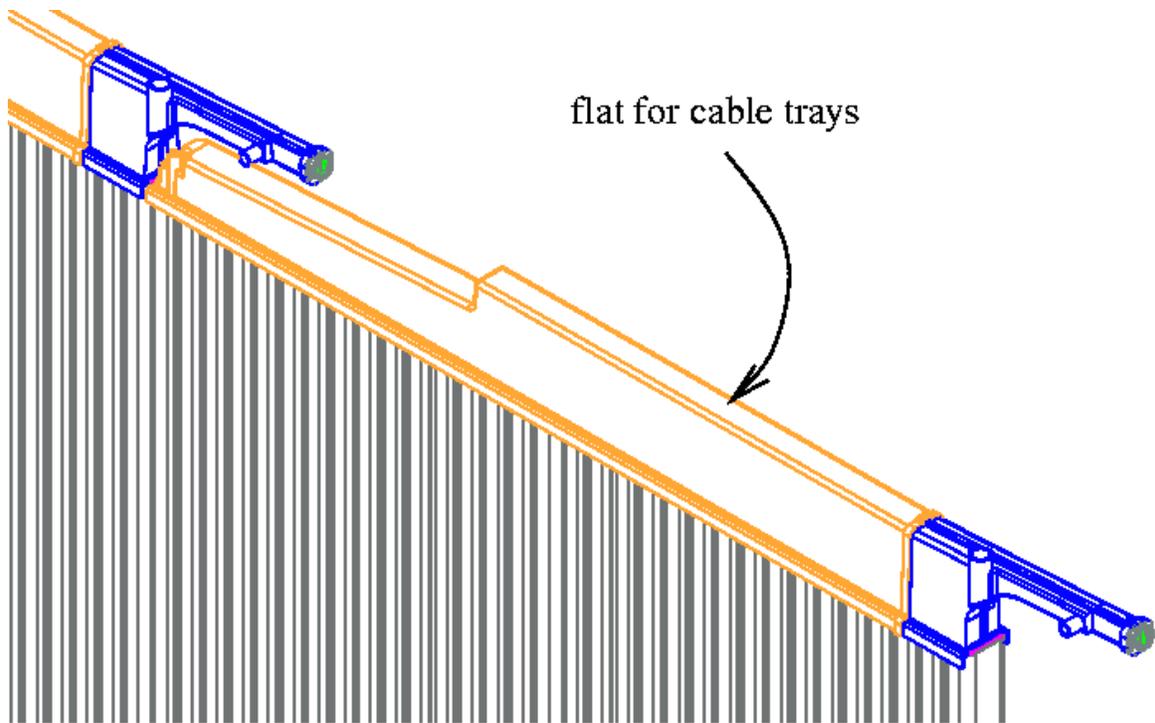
Nesting of two adjacent manifolds. The top of the manifold cover will support cable trays for the electronics.
